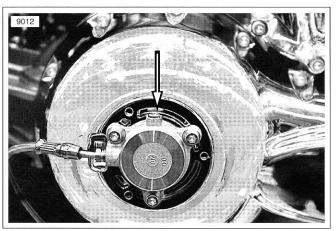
Secondary Clutch Actuator Bleed Screw
